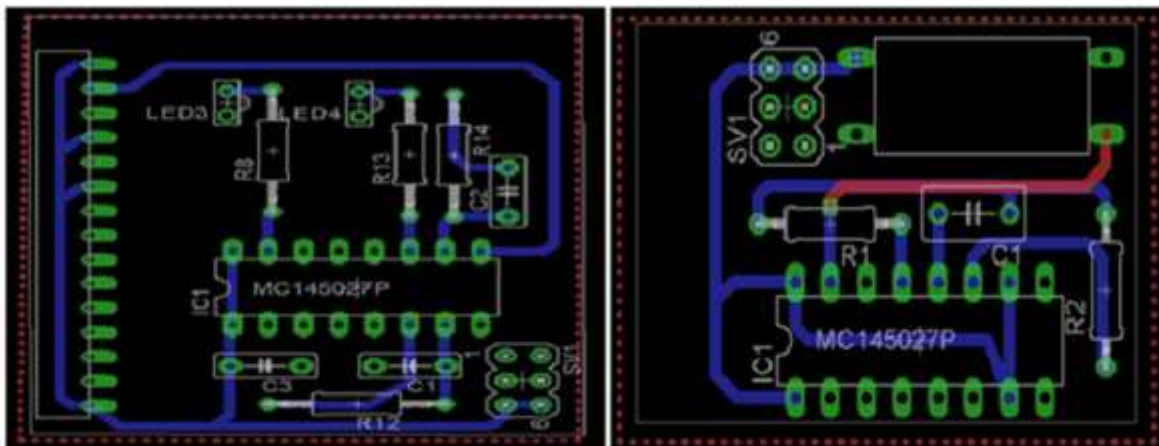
PCB Schematic - receiver and transmitter circuits
